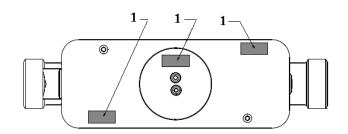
Sealing the flow sensor $q_p = 0.6$; 1; 1.5; 2.5 m³/hFig. 12.3. Sealing the flow sensor $q_p = 3.5$; 6 m³/hthreaded / flanged connectionthreaded / flanged connectioninstallation length L = 110 mm; 130 mm; 190 mminstallation length L = 260 mm
